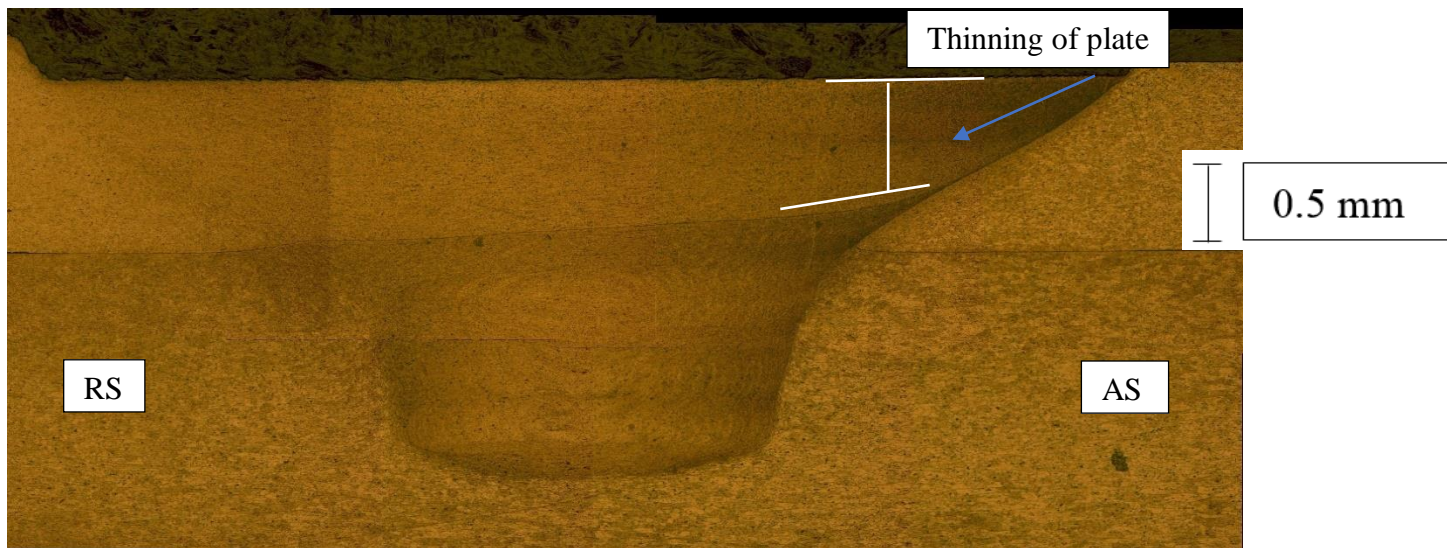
Weld macrostructure of 1 mm + 3.17 mm plates.
